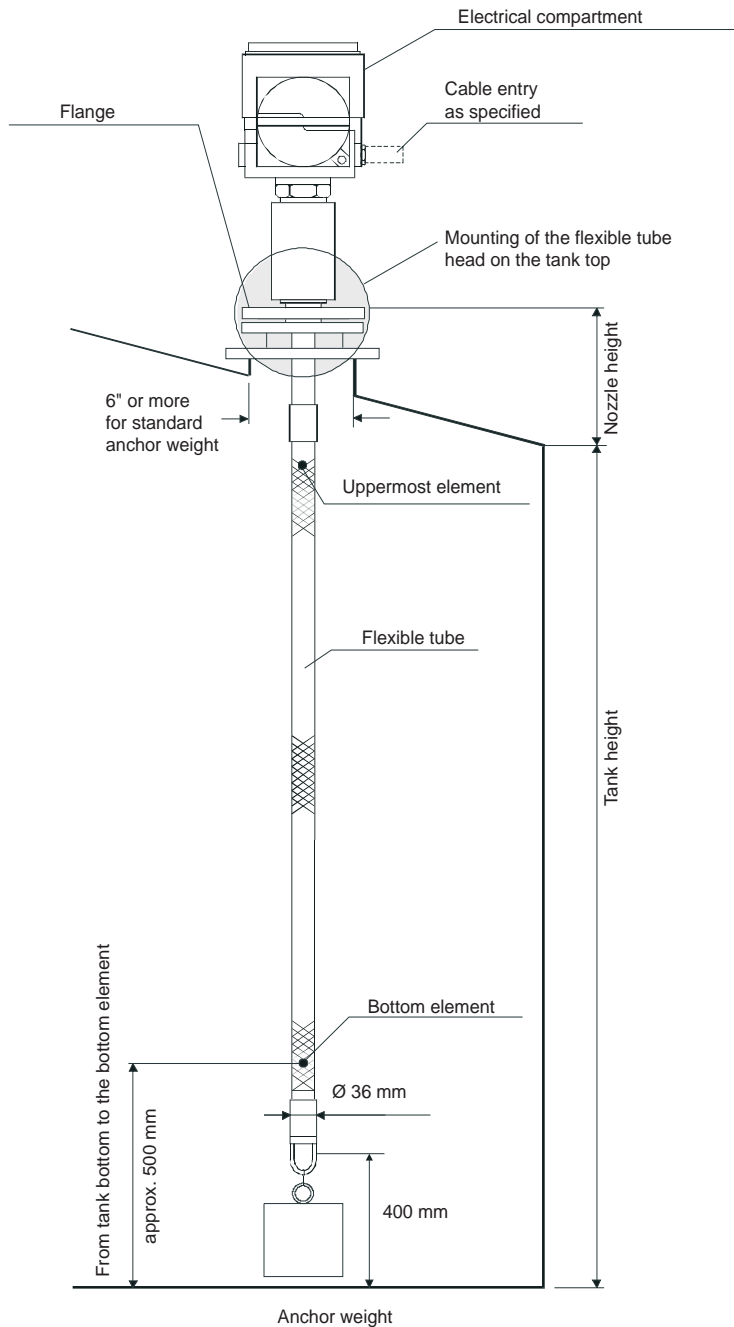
Mounting on a fixed roof tank by the anchor weight method
